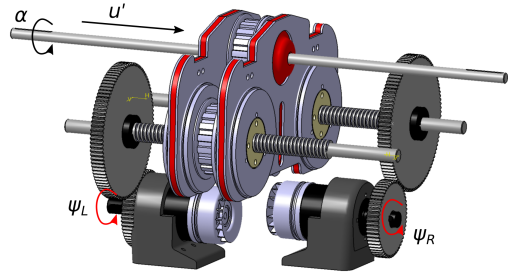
Rendering of the cylindrical drive only (mobile platform not shown)
